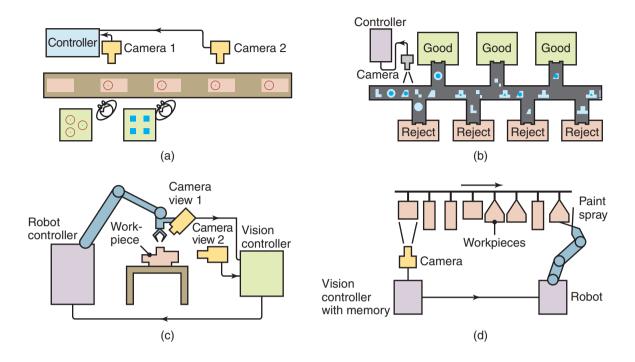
Examples of machine-vision applications. (a) In-line inspection of parts. (b) Identification of parts with various shapes, and inspection and rejection of defective parts. (c) Use of cameras to provide positional input to a robot relative to the workpiece. (d) Painting parts having different shapes by means of input from a camera. The system's memory allows the robot to identify the particular shape to be painted and to proceed with the correct movements of a paint spray attached to the end effector.
